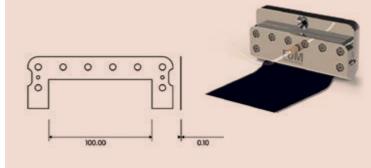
Example of a shim design for producing 100-mm wide coatings (left), and an assambled slot die head (right).
